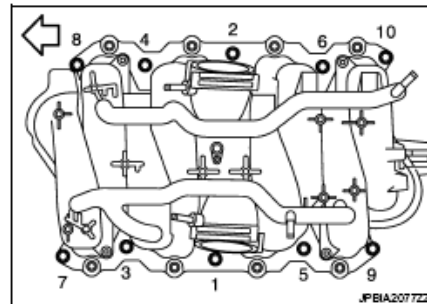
Identifying Intake Manifold Mounting Bolt Loosening Sequence
